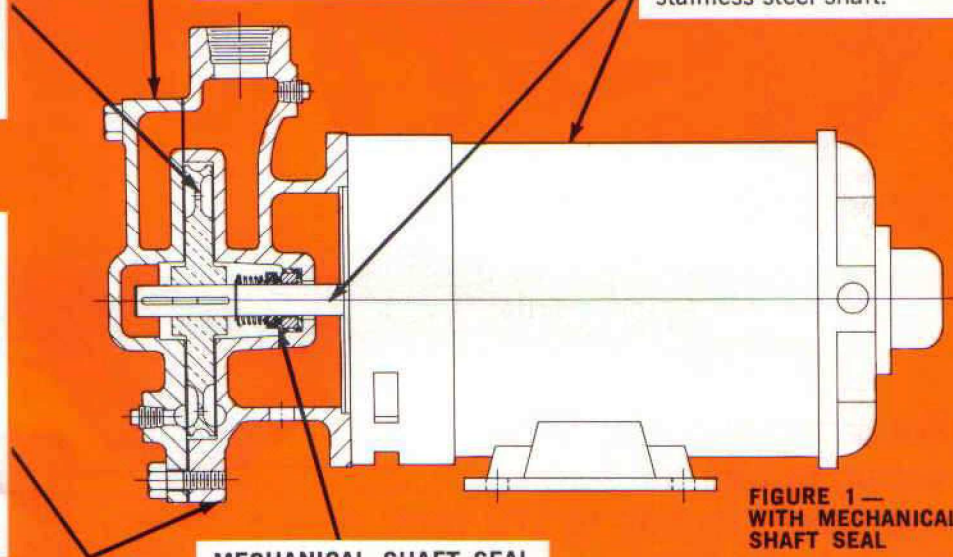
WITH MECHANICAL SHAFT SEAL
